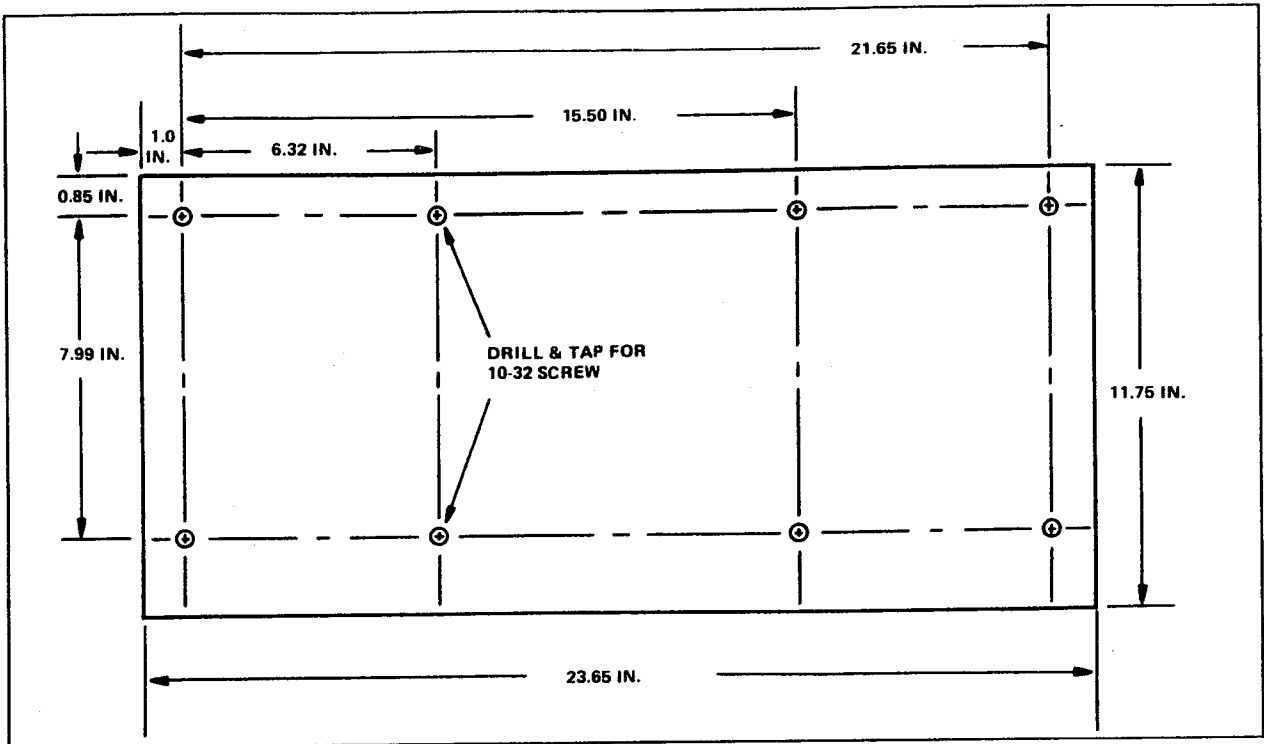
Layout Dimensions for 12-Module Rack (NLR-1012) or 13-Module Expansion Rack (NLRE-1013)
